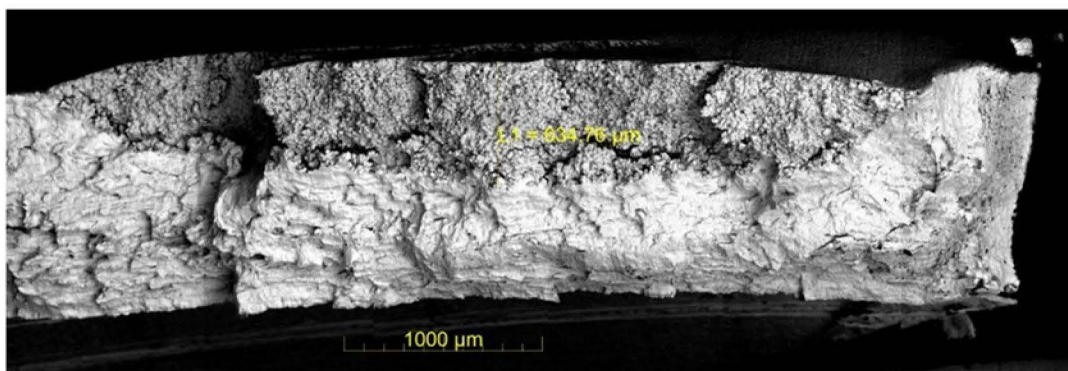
Parent Tube Crack Samples Following Burst Testing
